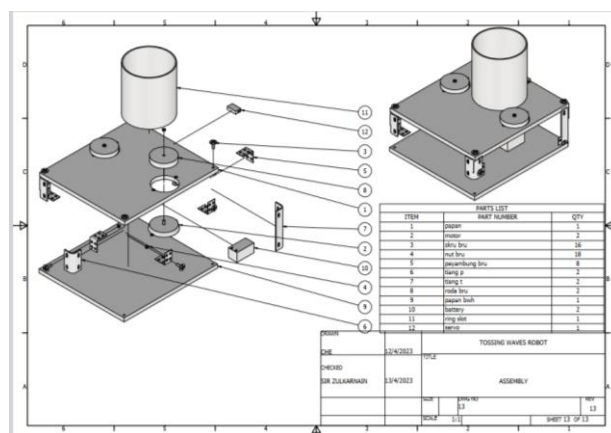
This is the assembly of Tossing Waves Robot and the exploded of Tossing Waves Robot.
